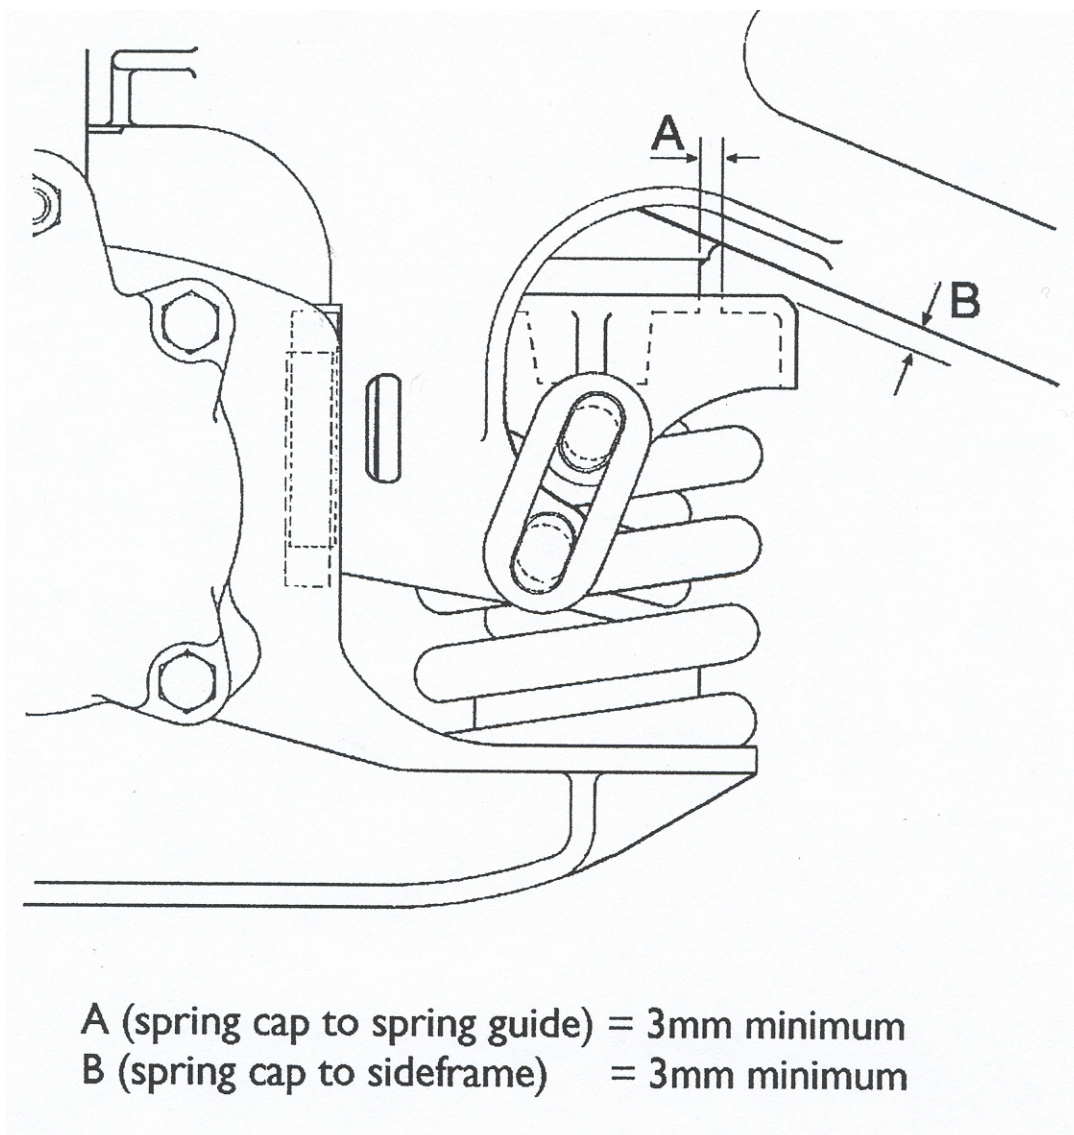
CAST BOGIE FRAME – MINIMUM CLEARANCE
